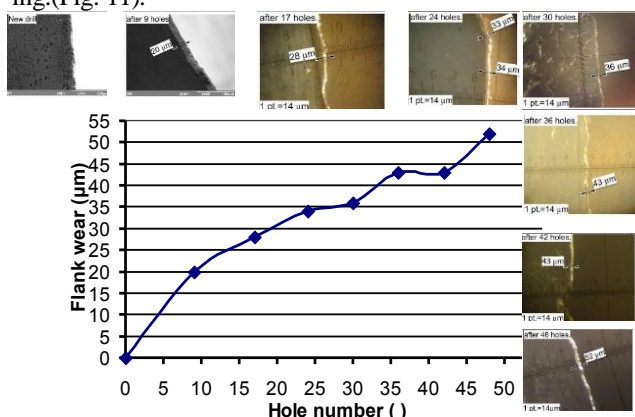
Progress of flank wear during CFRP/steel stack machining
